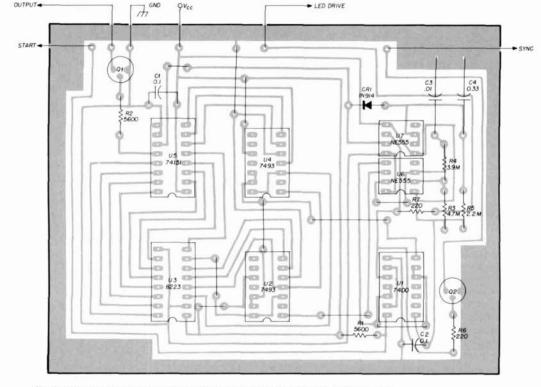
Full-size printed-circuit layout (foil side) for the 256-bit CW memory.
